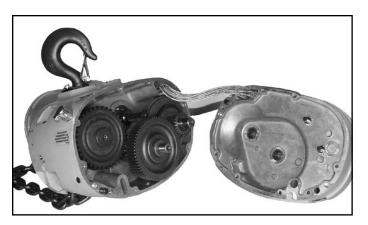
Gear Case Cover with Electrical Controls Removed from Frame
